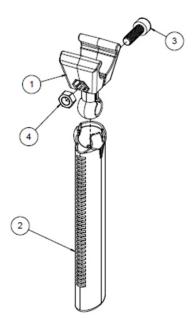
An exploded view, with the balloon numbering in correct order and logical assembly order.
